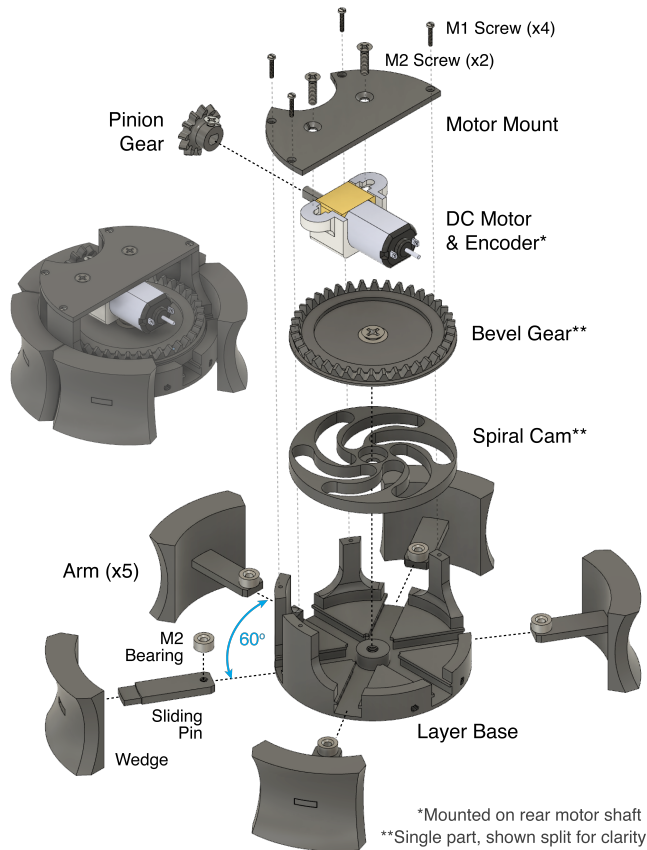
Exploded view of a single expanding layer. As the motor rotates, a pinion gear drives a bevel gear, which rotates a cam. Spiral channels in the cam drive 5 arms in/out of the layer base.
